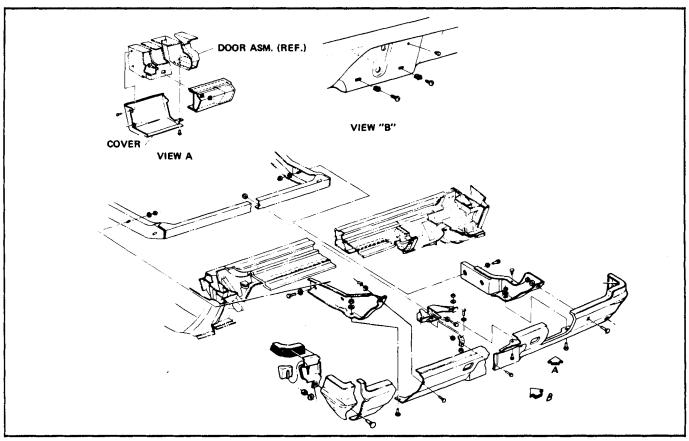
A Series Station Wagon Rear Bumper Assembly
